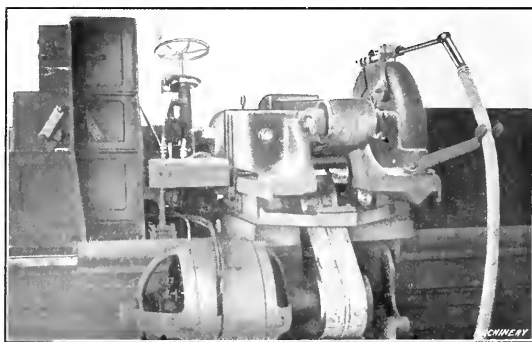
Rear View showing Wheel Drive and Pump Connection
